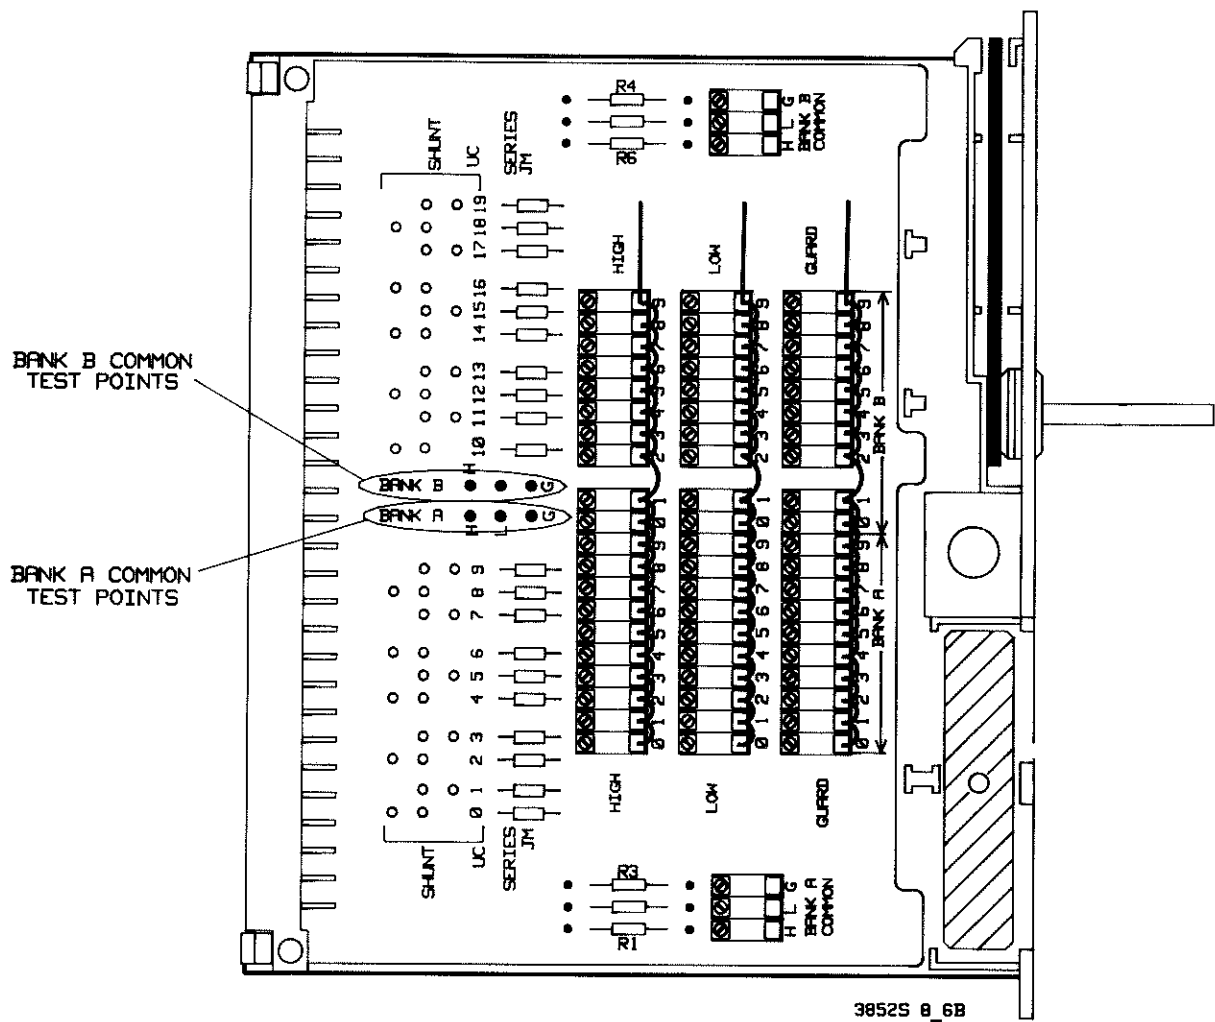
HP 44709A and HP 44710A Test Fixture
